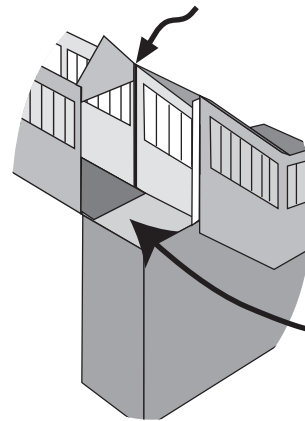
FIXING THE BRIDGE TO THE STAIRS.
